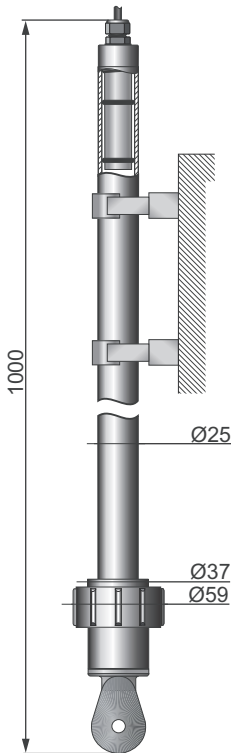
Dimensional sketch of inductive measuring cells with immersion armature
